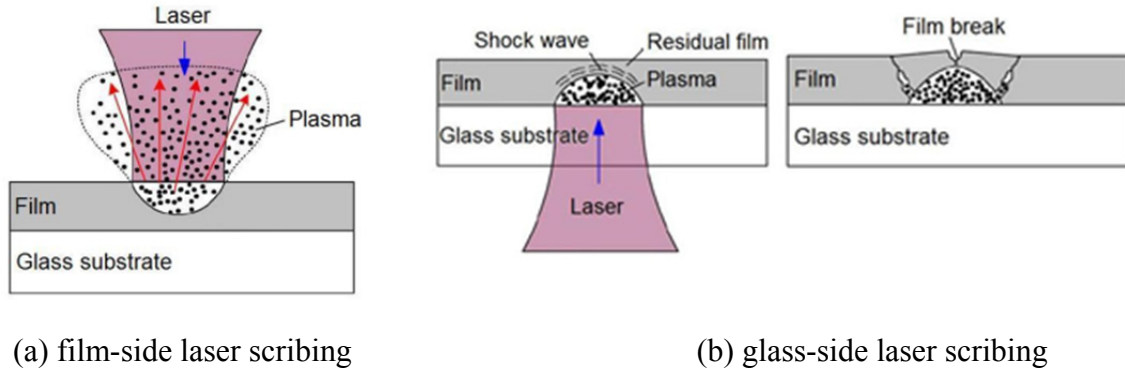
Schematic of (a) Ablative removal in film-side laser scribing; (b) Micro-explosion-based removal in glass-side laser scribing (Wang et al. 2010)
